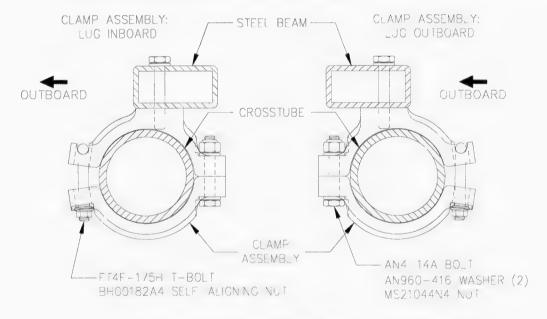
Beam Installation – Clamp Detail Lug Inboard and Lug Outboard Installations Shown
